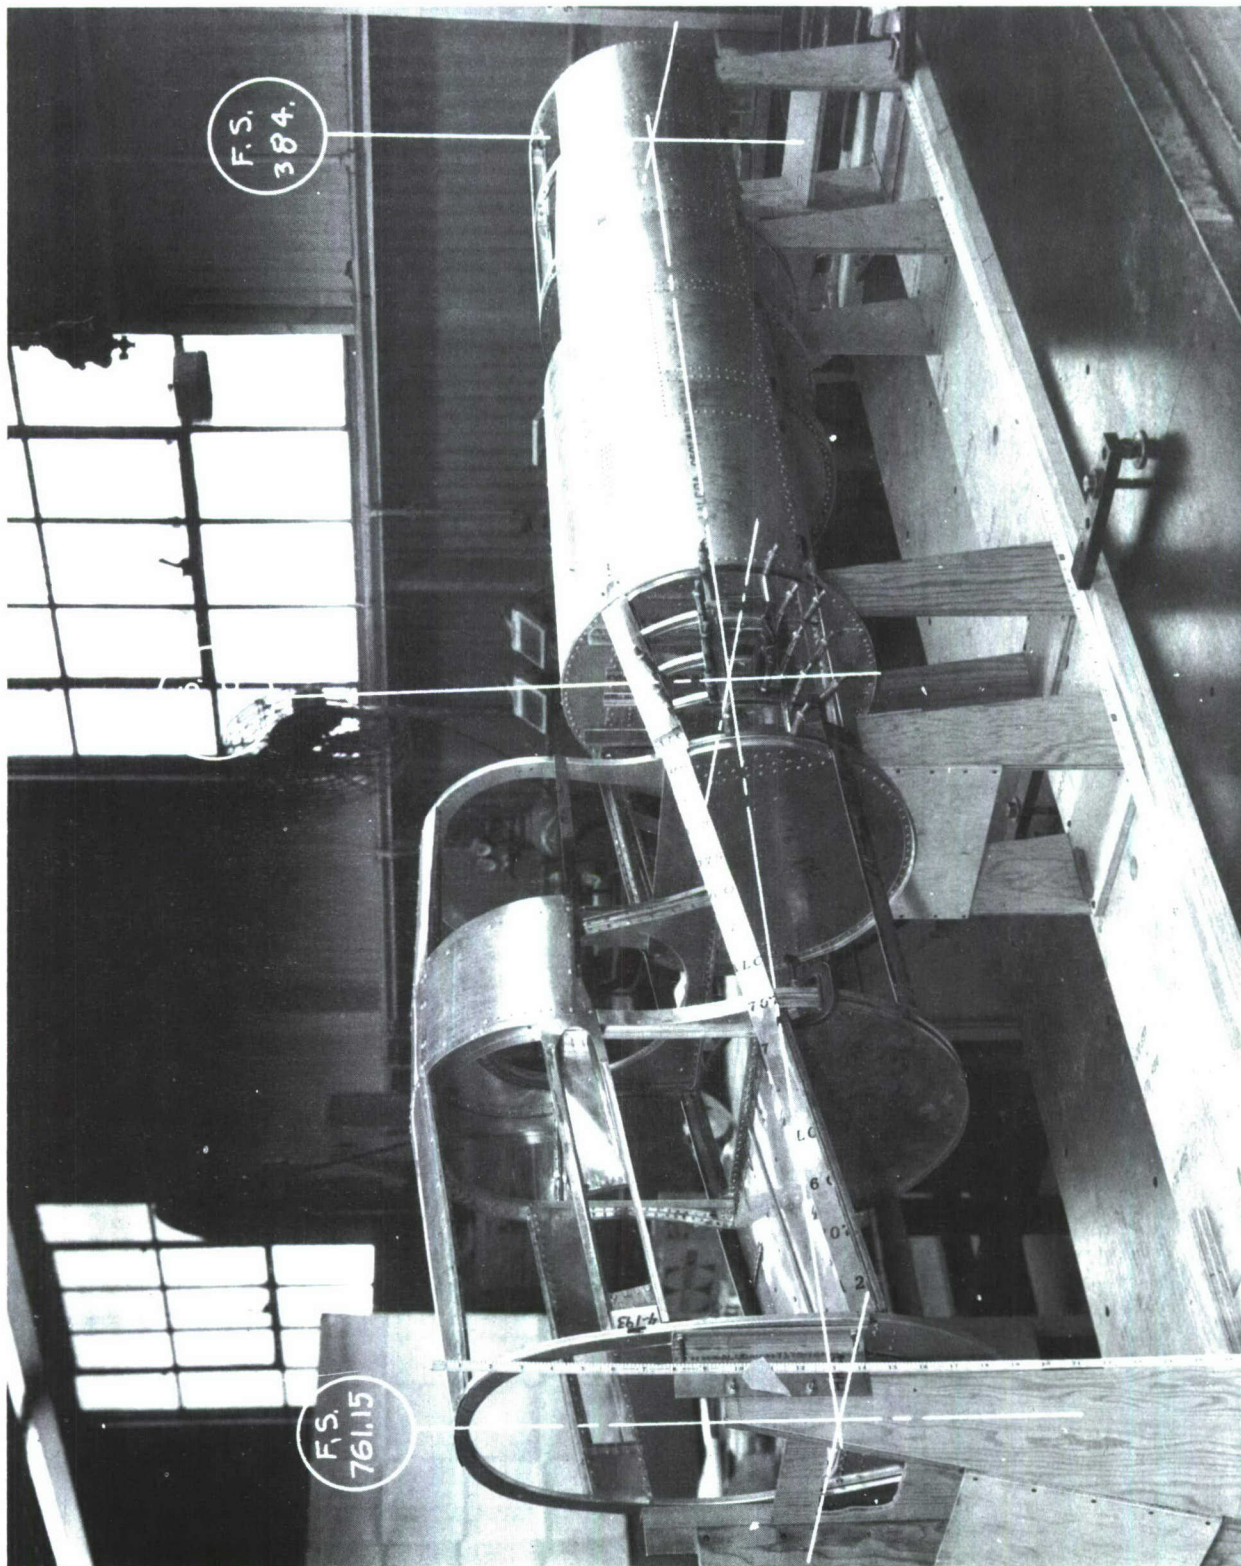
AFT MAIN OF MODEL ASSEMBLED
